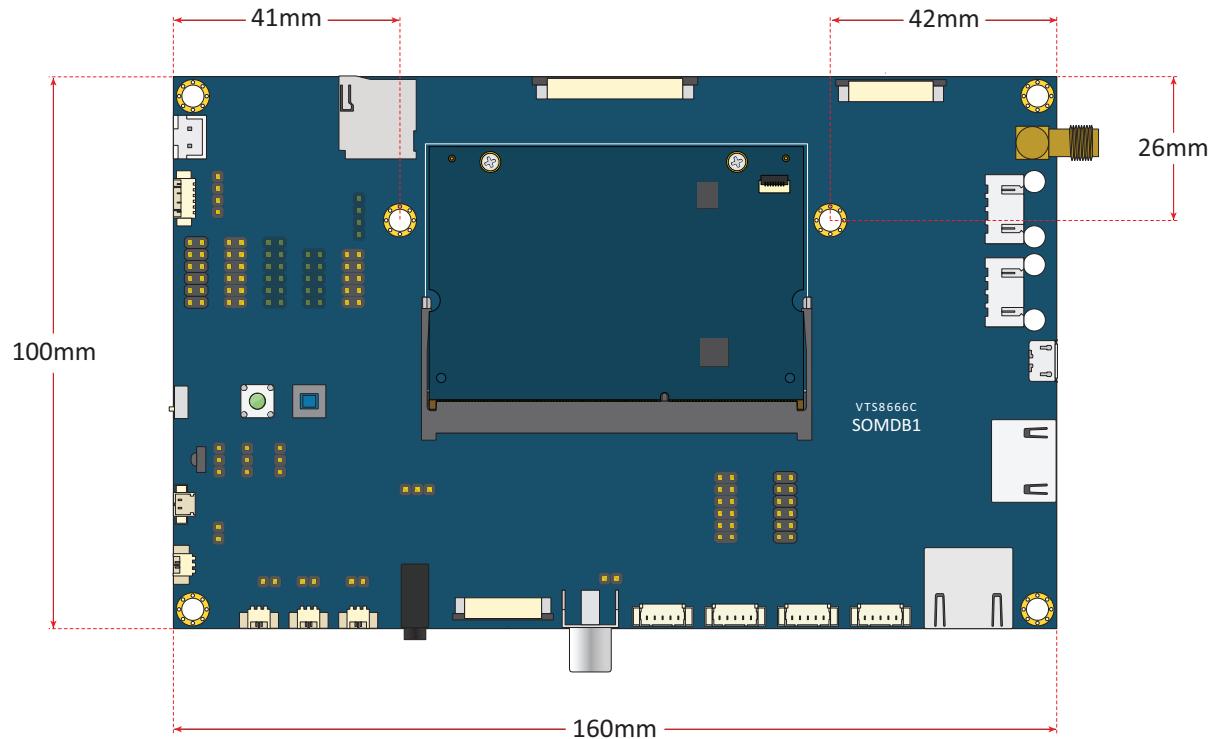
Dimensions of the SOMDB1 carrier board with the SOM-6X50 module installed
